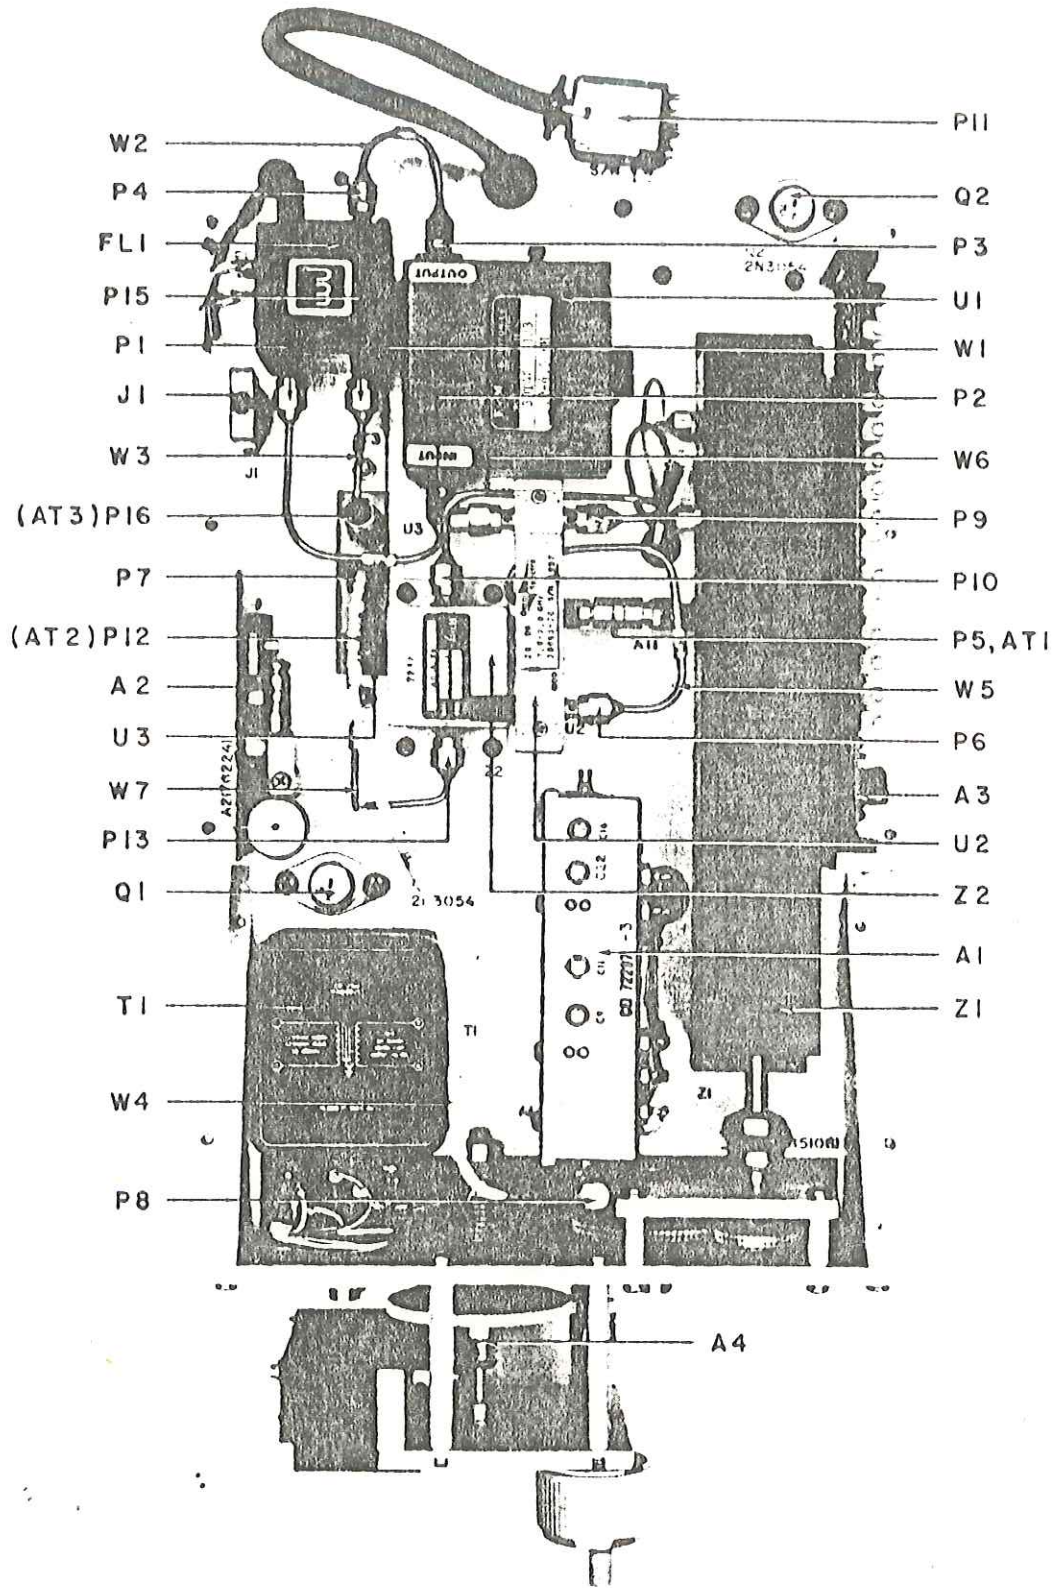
Type TH-245B Tuning Head, Top View, Location of Components
